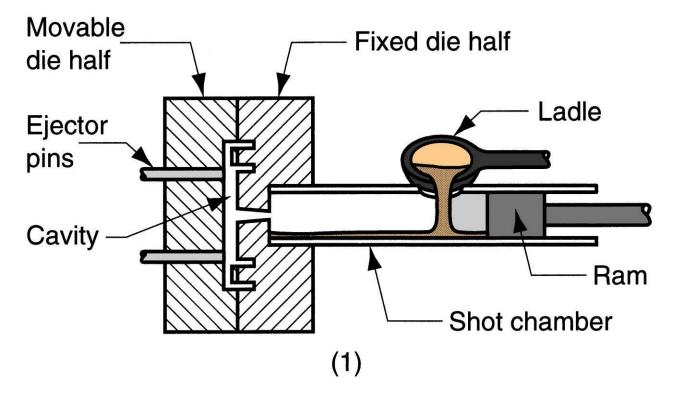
Cycle in cold-chamber casting: (1) with die closed and ram withdrawn, molten metal is poured into the chamber
